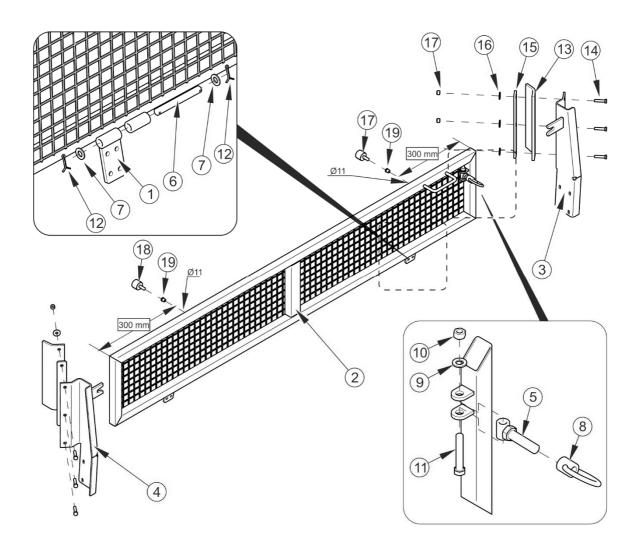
Installation of front wall extension. Marking according to table A.2
